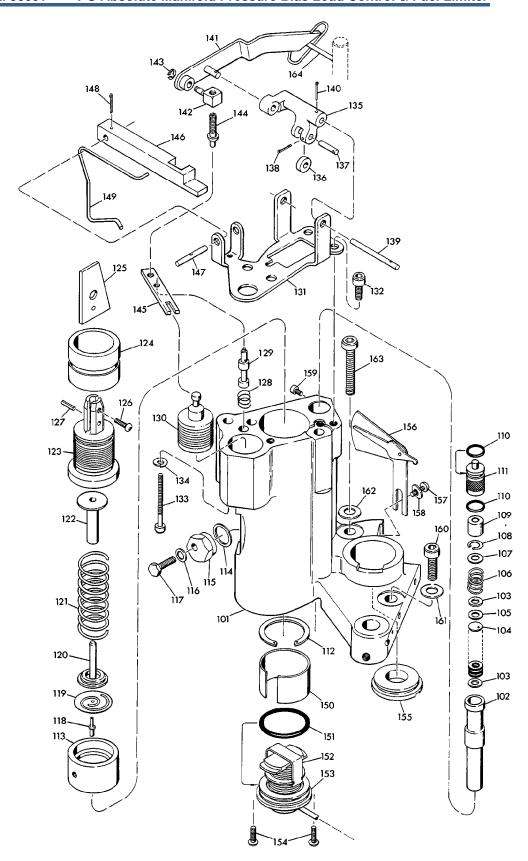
Exploded View, Absolute Manifold Pressure Bias Load Control and Fuel Limiter (Single Barrel Model)
